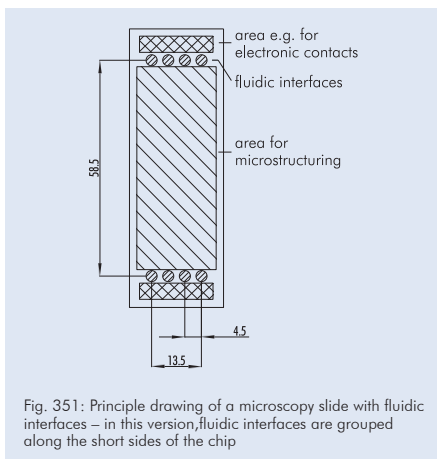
Principle drawing of a microscopy slide with fluidic interfaces – in this version, fluidic interfaces are grouped along the short sides of the chip.
